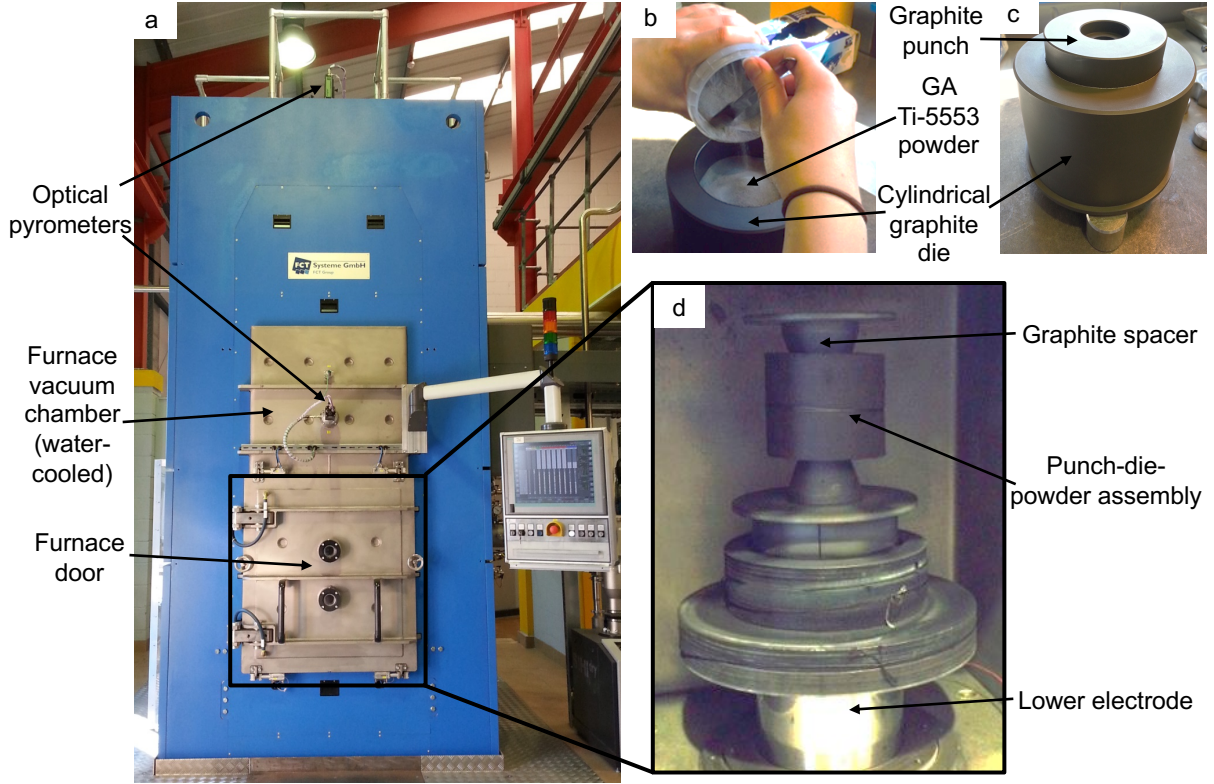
Annotated photographs of: (a) the FAST machine at Kennametal Manufacturing UK Ltd which was used to produce large-scale FAST specimens; (b) gas atomised Ti-5553 powder being poured into the cylindrical graphite die; (c) the punch-die-powder assembly ready to be placed into the FAST machine; and (d) a punch-die-powder assembly being raised into the furnace
